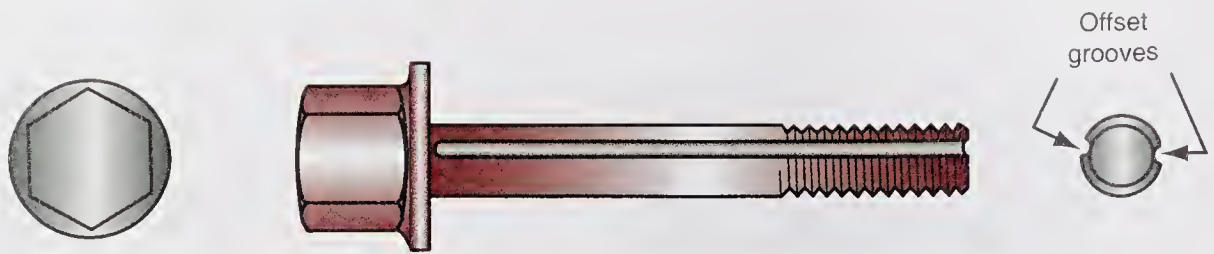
Camber/caster adjustment bolt with offset grooves.
